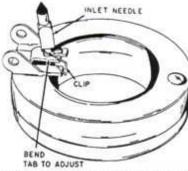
View of float and fuel inlet valve needle. The valve needle shown is equipped with resilient tip and a clip. Bend tab shown to adjust
